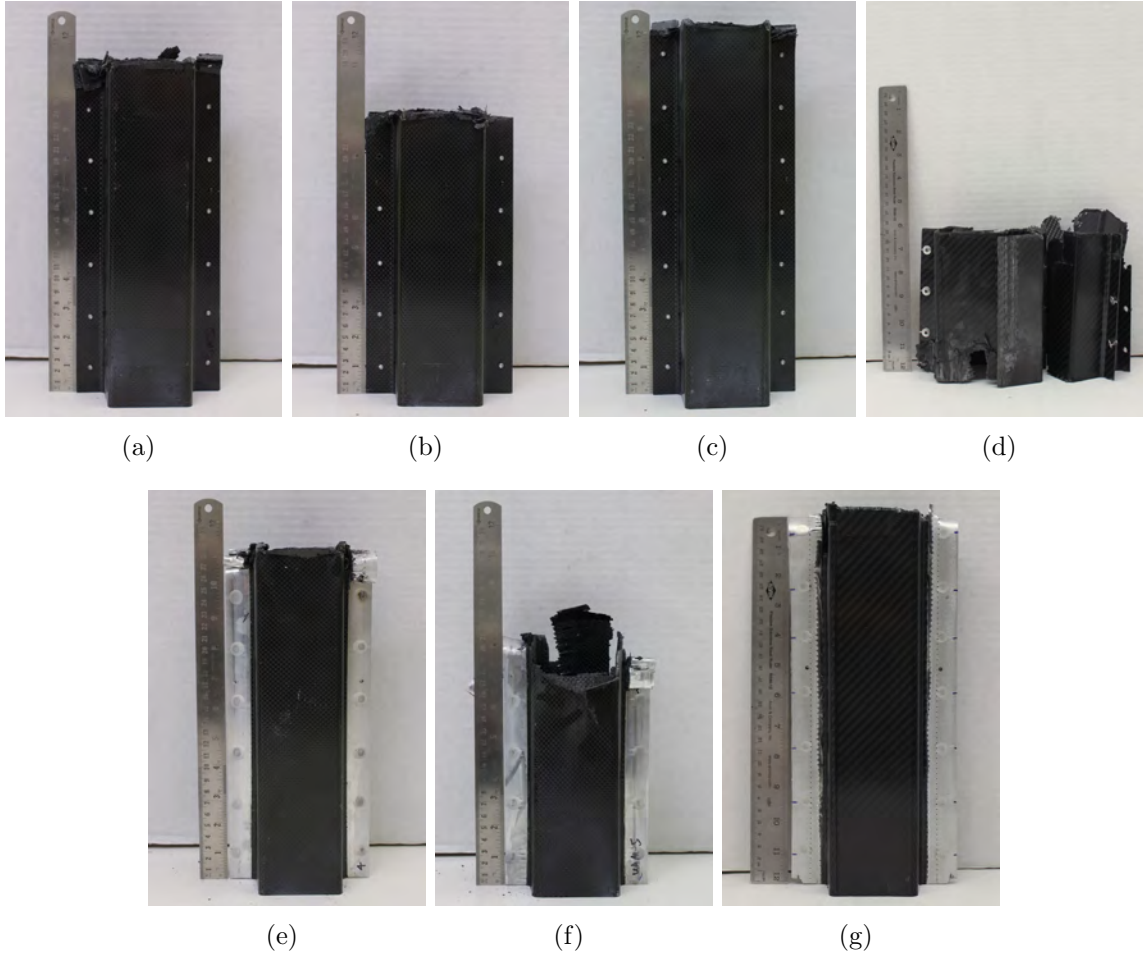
CFRP double-hat structures after axial crush testing: (a) to (d) riveted samples; (e) to (g) UAM samples.
